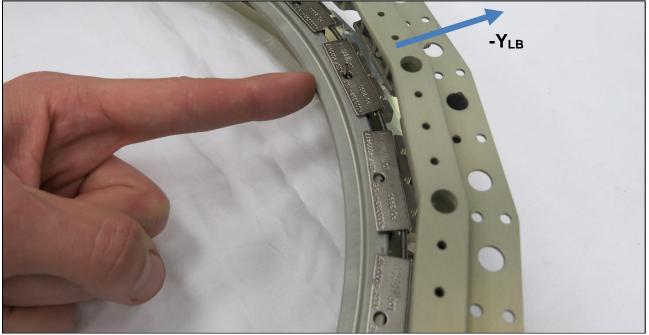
Applying force to Retaining Ring in radially outward direction during Ball Screw rotation
